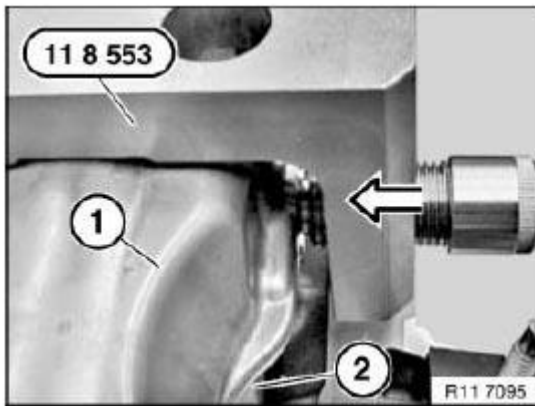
Tightening Screw Of Special Tool (11 8 553) To Ground Surfaces Of Lower Bearing Bank And Upper Bearing Bank
